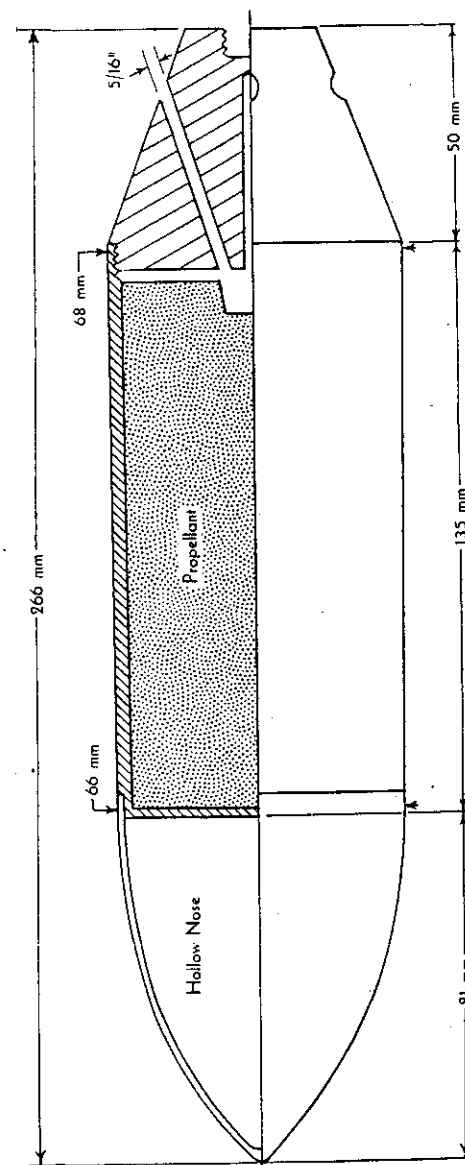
Sketch of rocket motor for 68-mm projectile.
